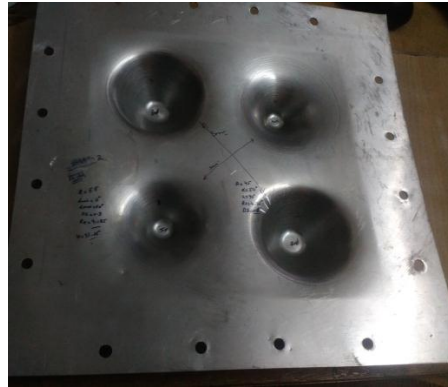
View of sheet upon unclamping the sheet from the flanges
